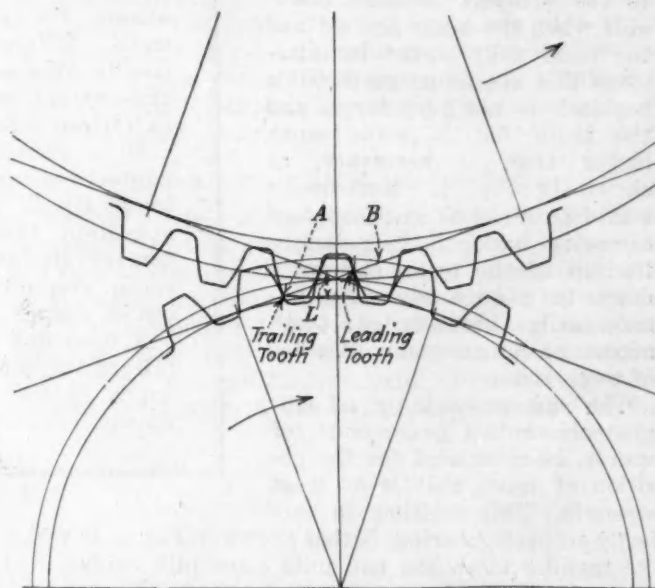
TOOTH CONTACT IN STUB-TOOTH GEARS
